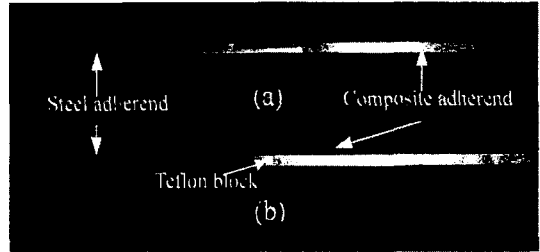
Photograph of the co-cured lap joint specimens. (a) Co-cured single lap joint specimen; (b) co-cured double lap joint specimen.
